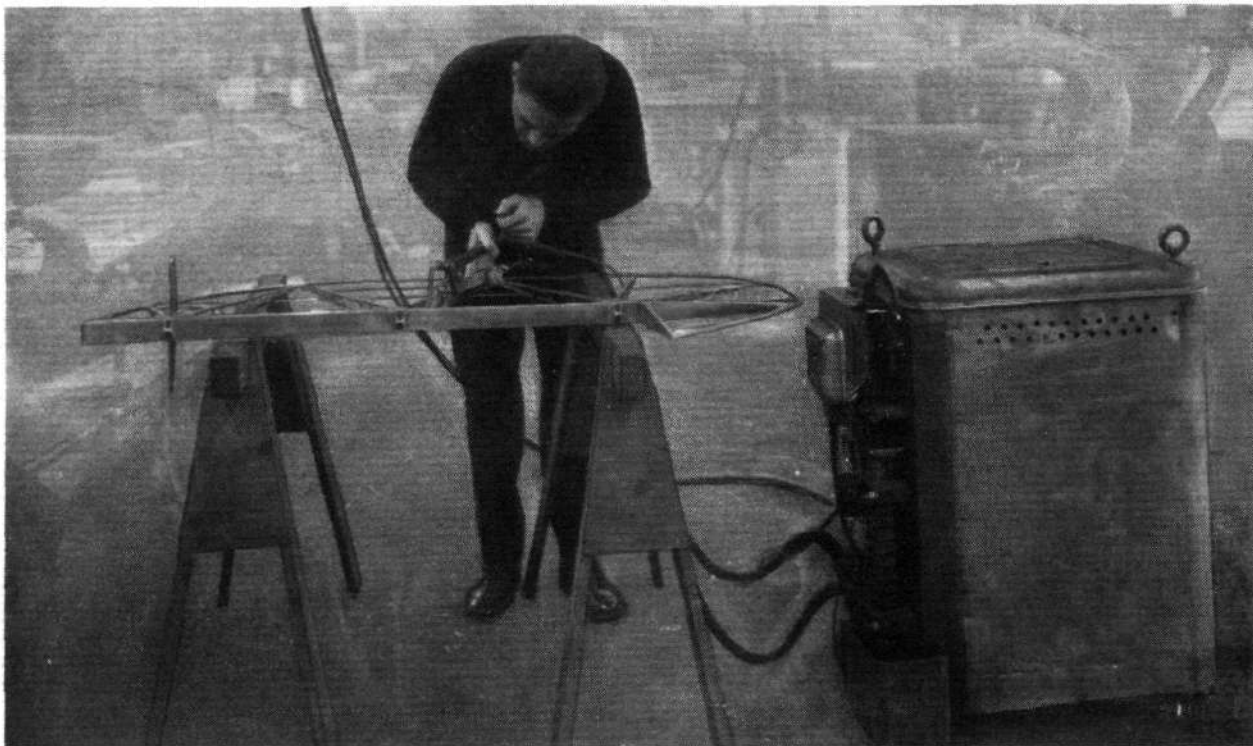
, WELDING TOOL IN USE : The method of connection to the welder is shown, and the general compactness will be noted.
